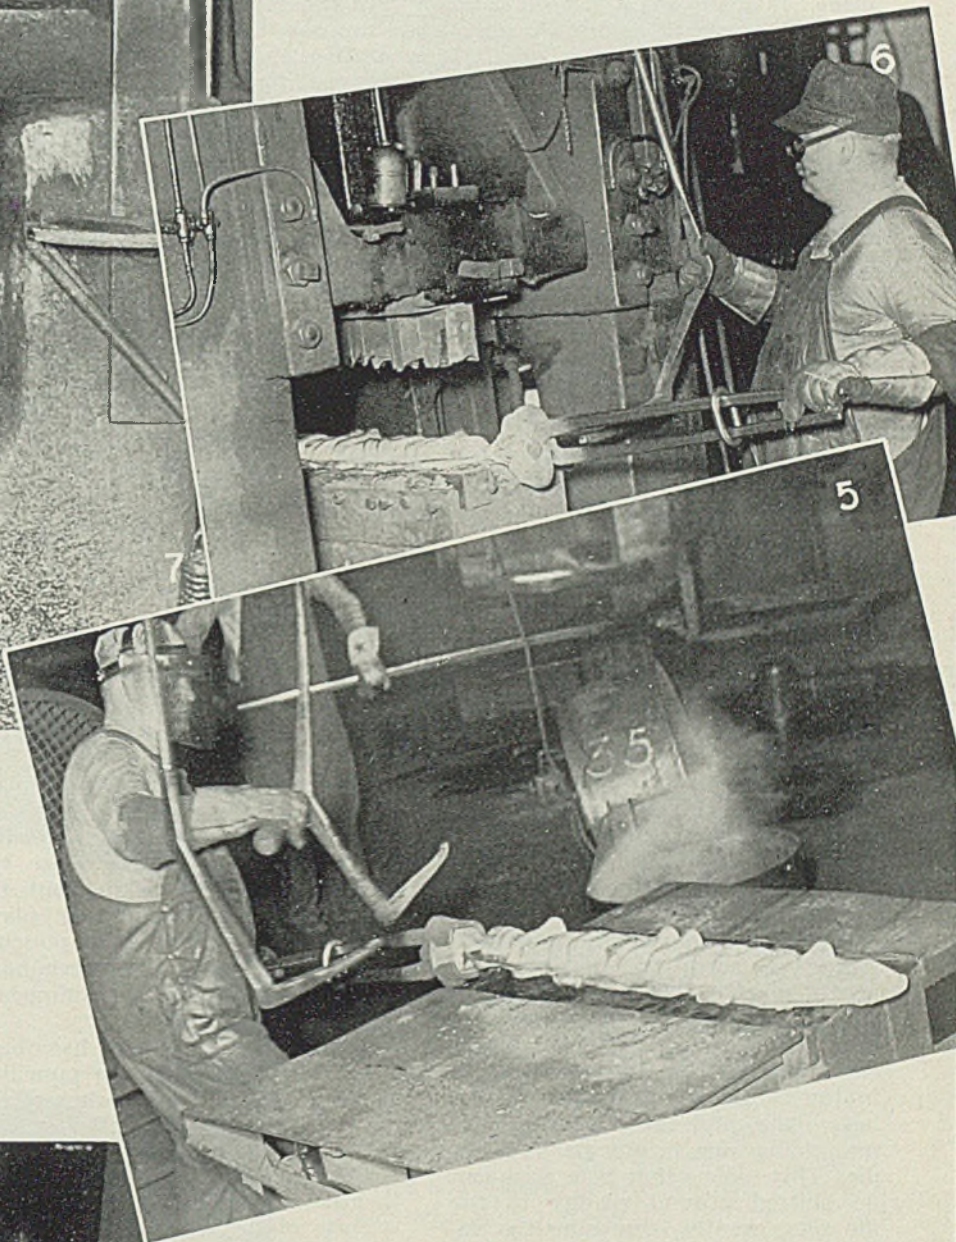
Here the balancer weights forged on the crankshaft are being cooled by immersing just their tips as shown. Note that main body of forging is not immersed here since it is desired to keep its temperature up to permit trimming the flash while hot. Operator cools first one set of balancers, removes work from tank to adjoining bench, turns it over and places it back in the quench to cool other side. He is shown about to engage a C-hook (suspended from an overhead cable) into his tongs, which will then make it easy to swing the work over to the next operation—trimming
